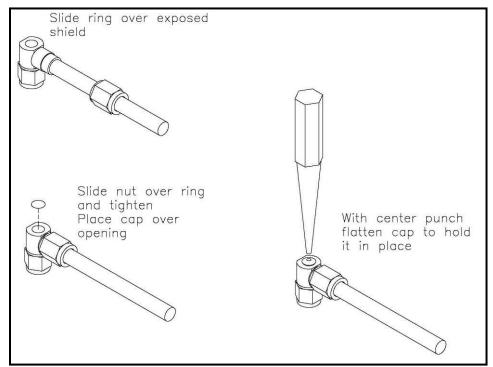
Cable Assembly Detail Spice and Shield Staggering
